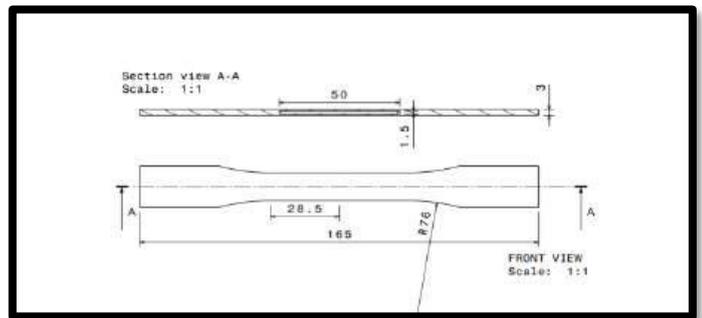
Specimen 2D Drawing (Front View and Its Section View), dimensions in mm
